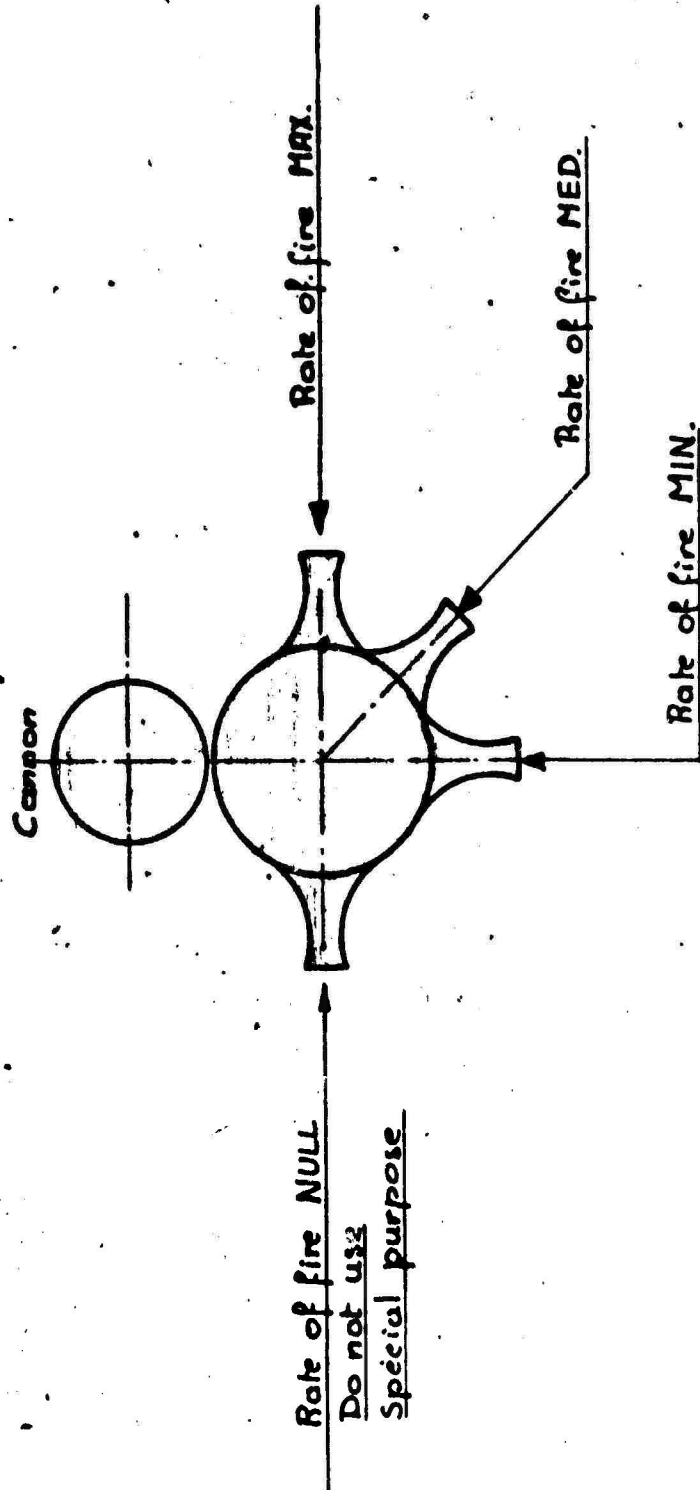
FN Machine Gun Gas Regulator Settings.
